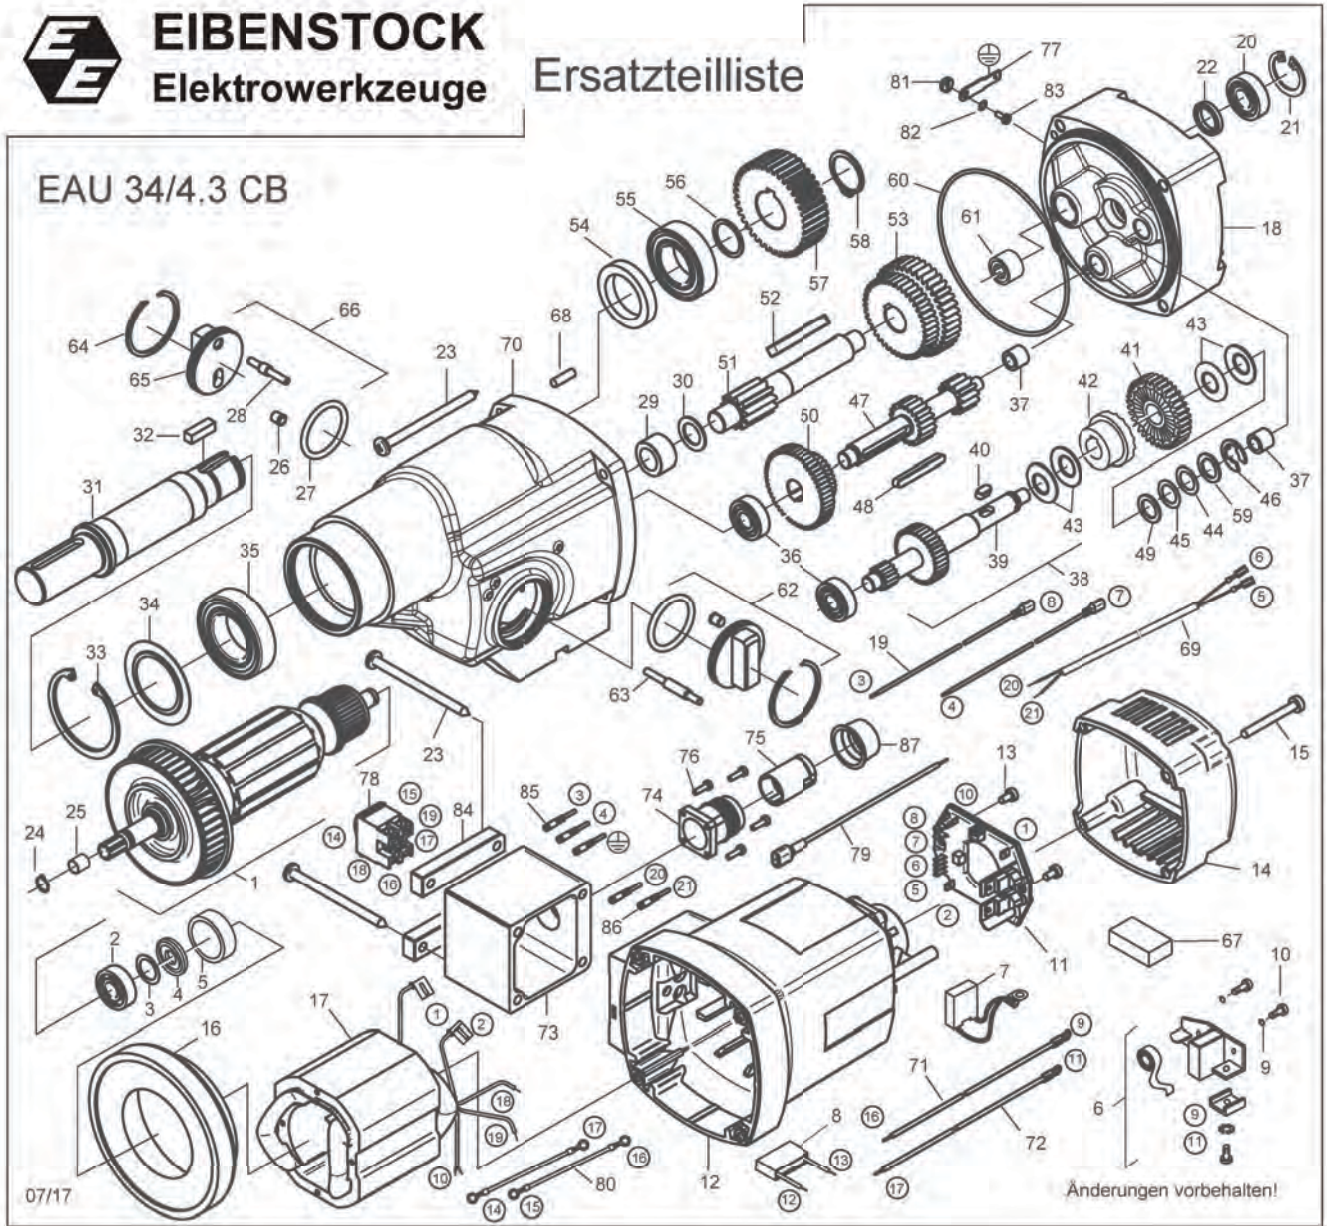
EIBENSTOCK MOTOR ASSEMBLY -- GEN. 2 ONLY
